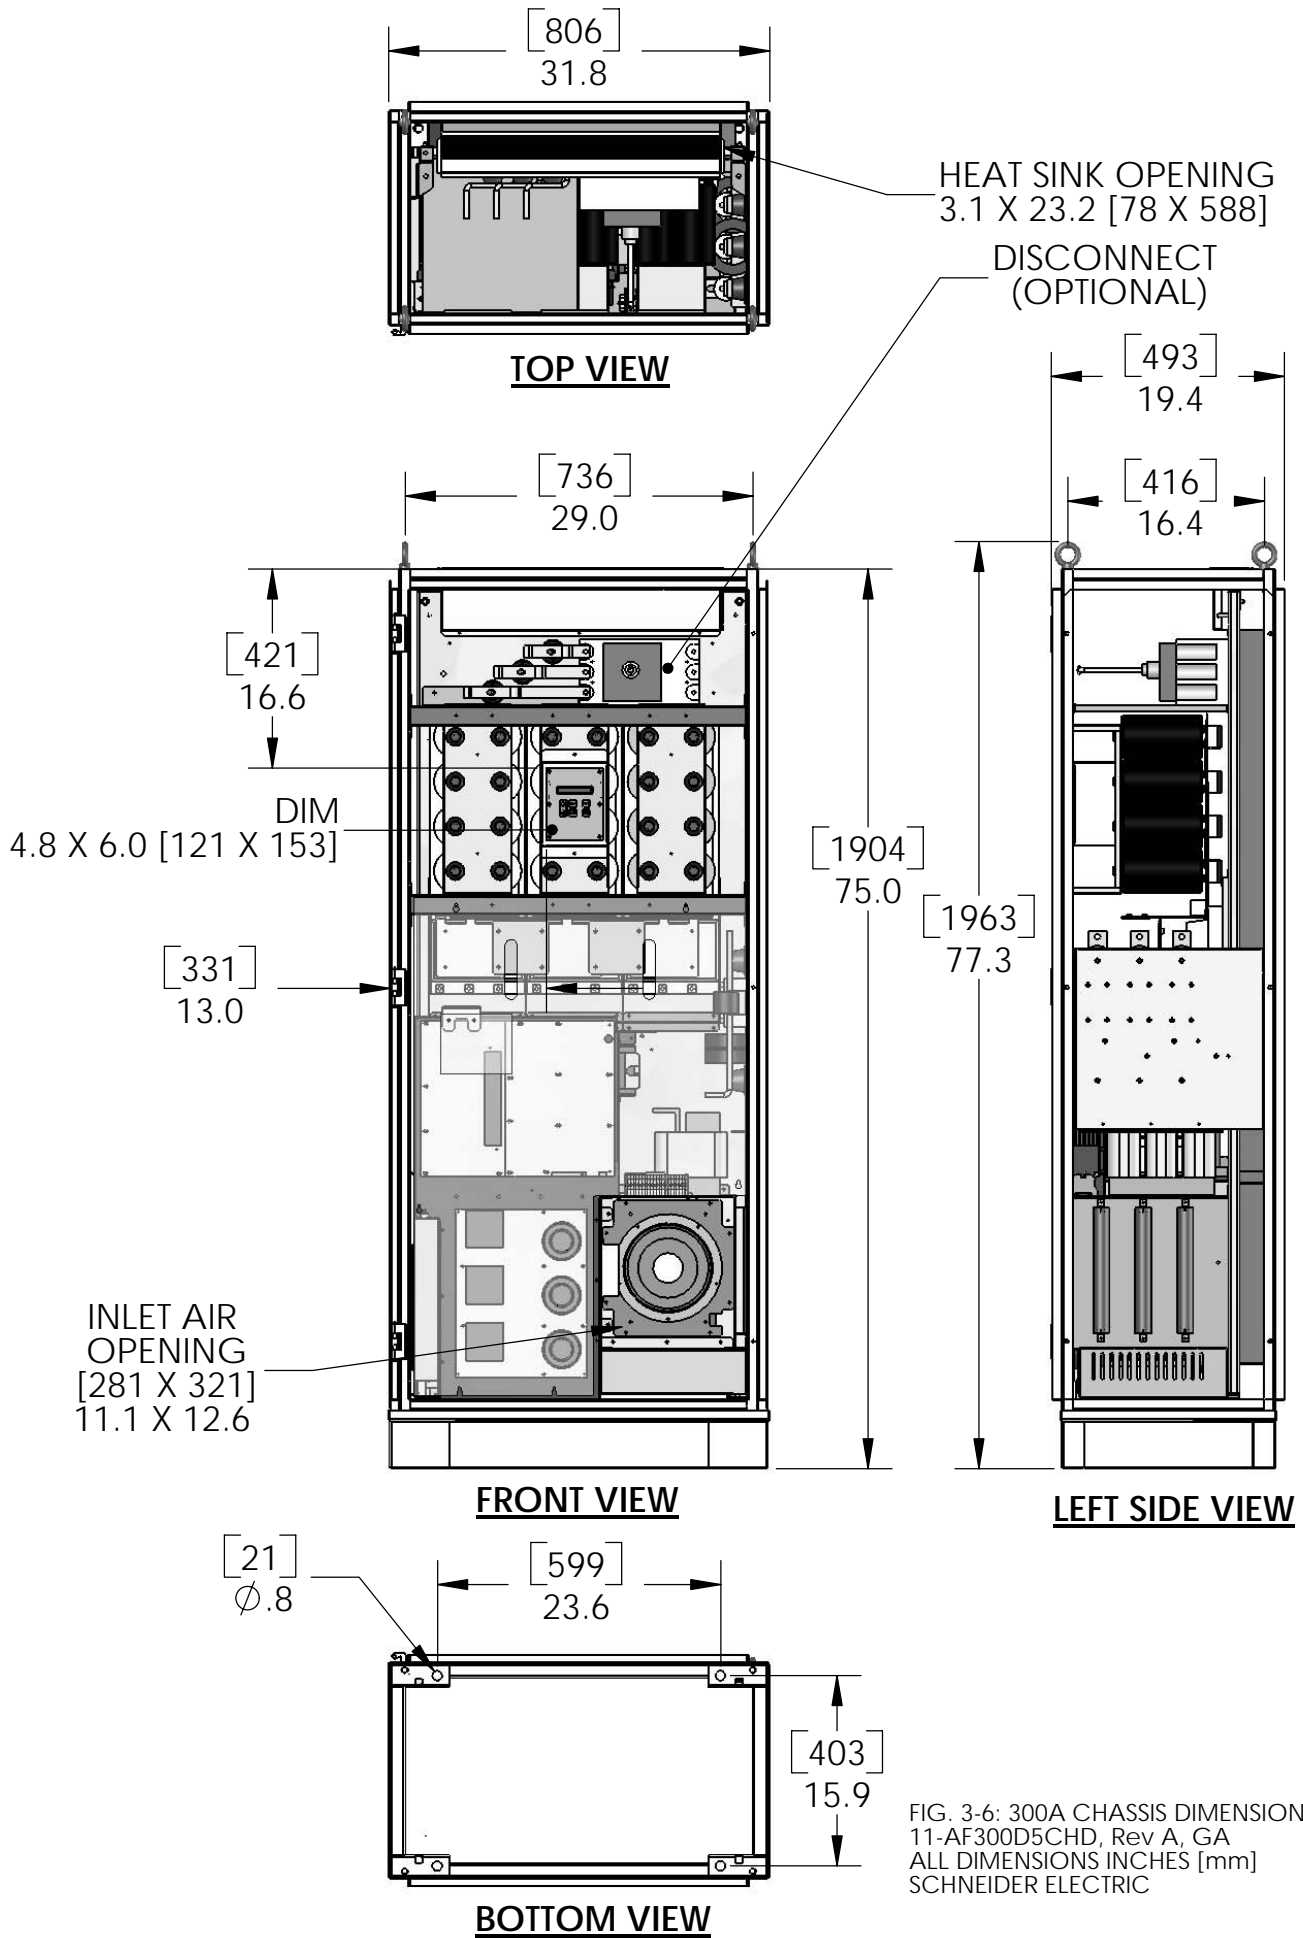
300A CHASSIS DIMENSIONAL DWG
